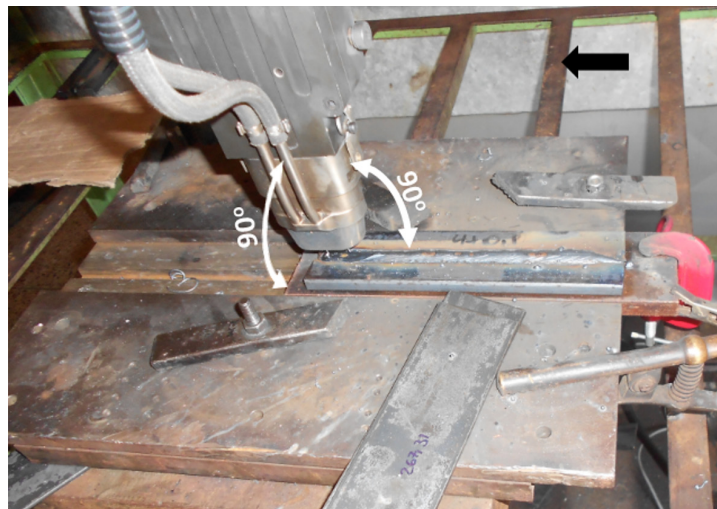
Position of the welding torch in relation to the test plate. The angle of attack, work angle and welding direction are shown (the wires exit the torch in parallel).
